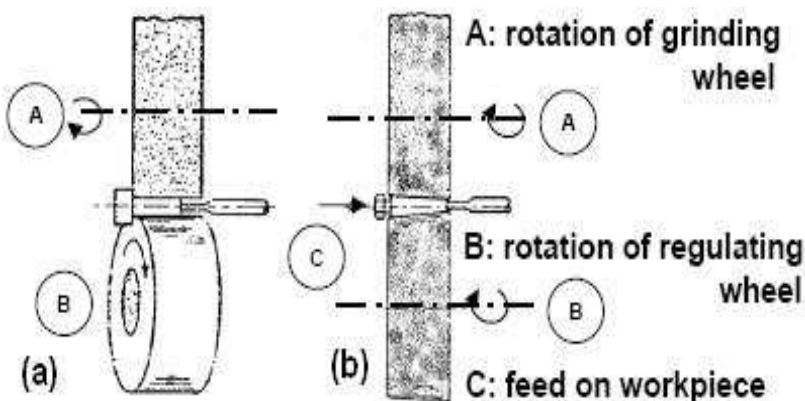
Centreless (a) infeed and (b) end feed grinding
